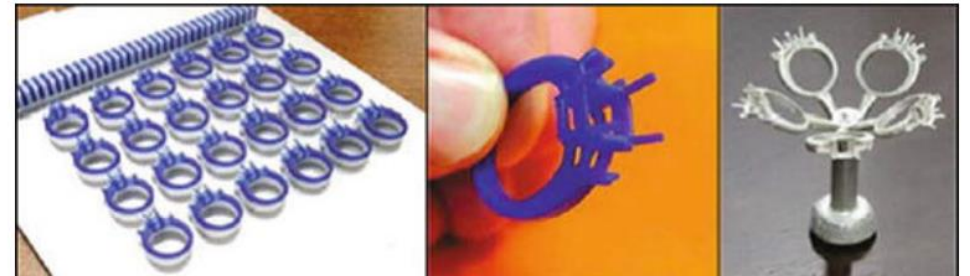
Rings for investment casting, made using a ProJet[®] CPX 3D Printer (Courtesy 3D Systems)
